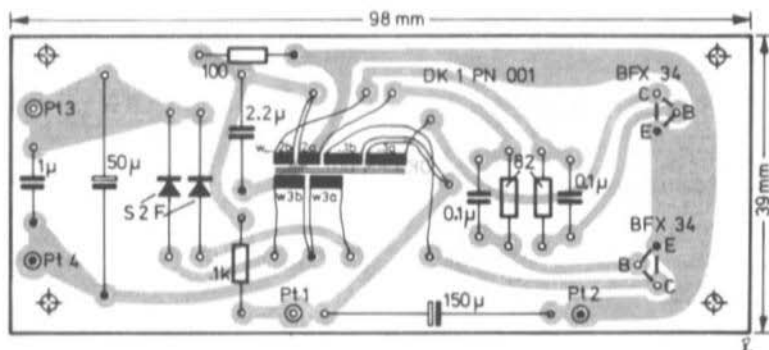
Printed circuit board DK 1 PN 001 and component locations
